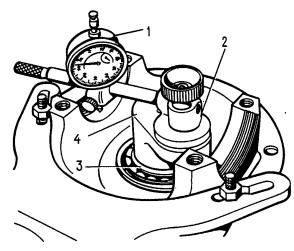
Determining Thickness of Drive Pinion Adjusting Ring:
